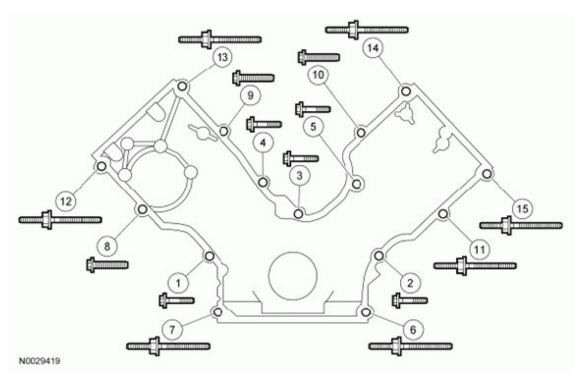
Positioning Engine Front Cover Courtesy of FORD MOTOR CO.
